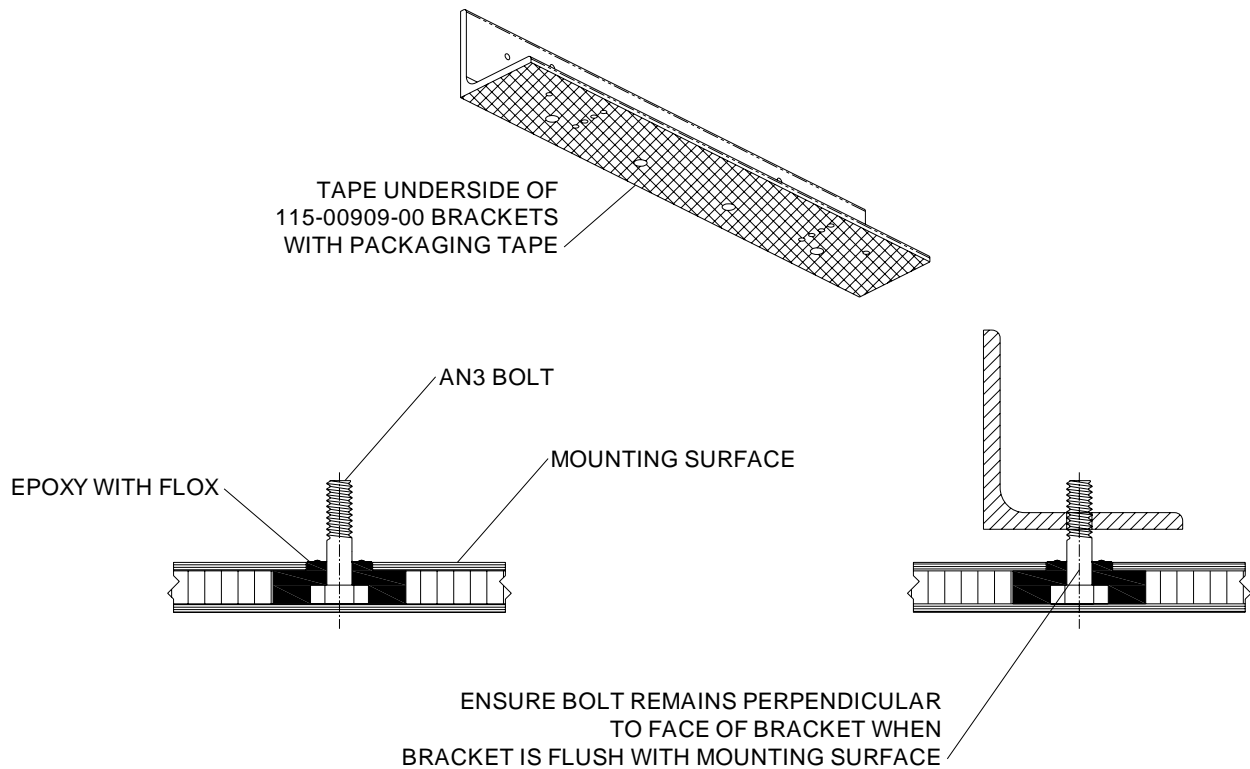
Mounting Bolt Installation and Alignment (Composite Aircraft)
